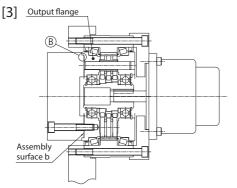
Assembly procedure A series F2C type (assembly example 1)
